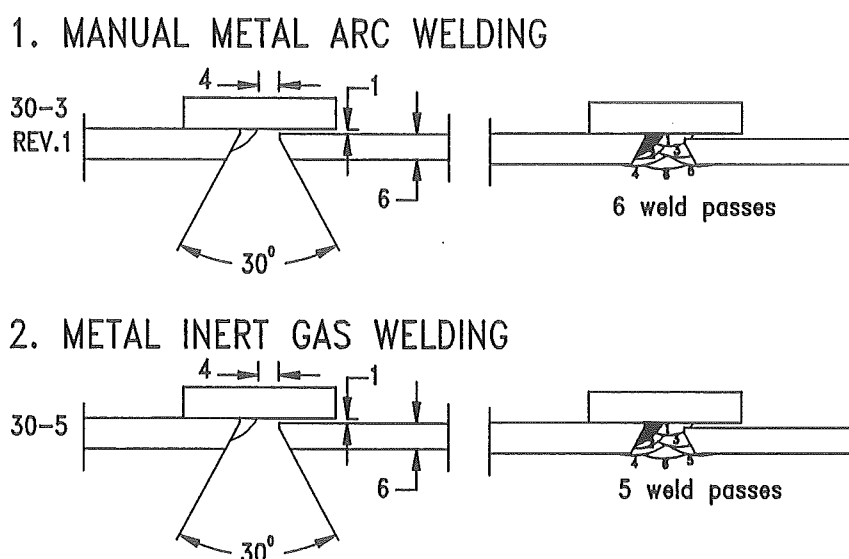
Weld procedure specification - edge preparation and bead sequence.
